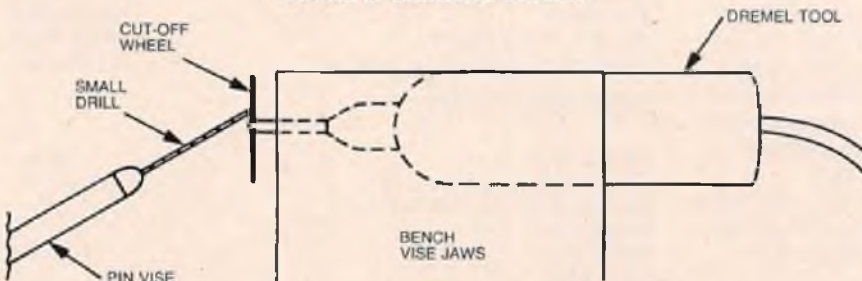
DREMEL TOOL USED TO SHARPEN SMALL DRILLS.
